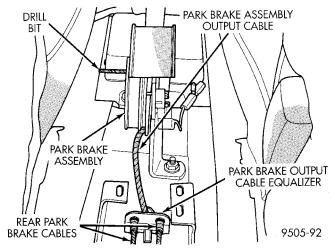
Park Brake Cables Properly Installed In Equalizer
